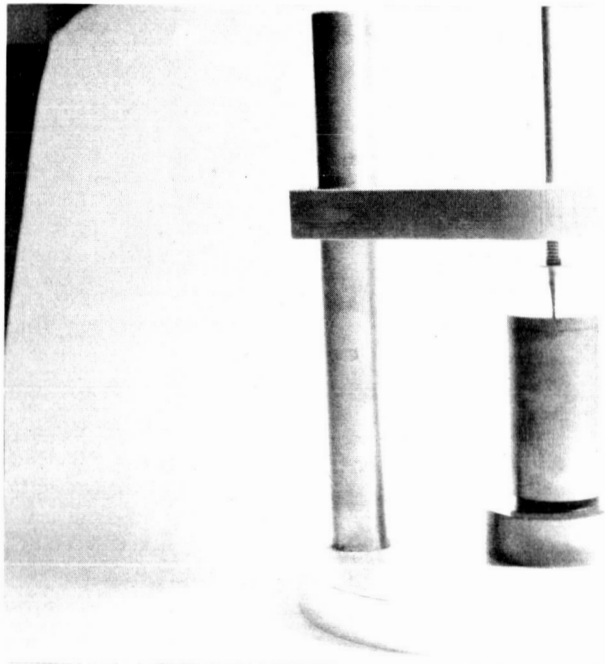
Parallel Lapping Jig with Mounting Fixture
